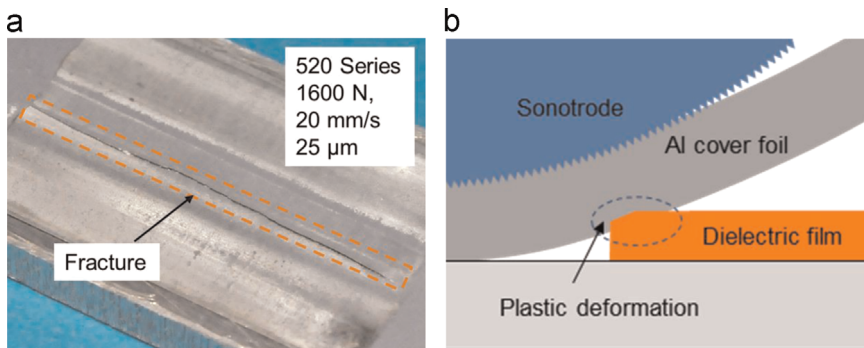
(a) Fracture on the Al cover foils along the front edge of dielectric films; and (b) Schematic drawing of the mechanism of fracture formation.
